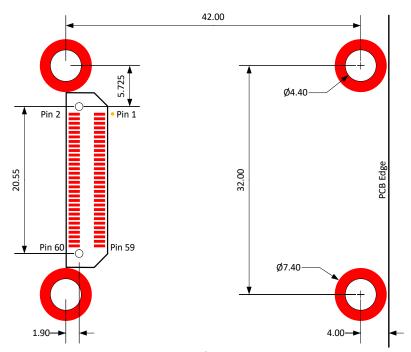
Carrier board dimensions for MIPI DSI display adapter (top view)
